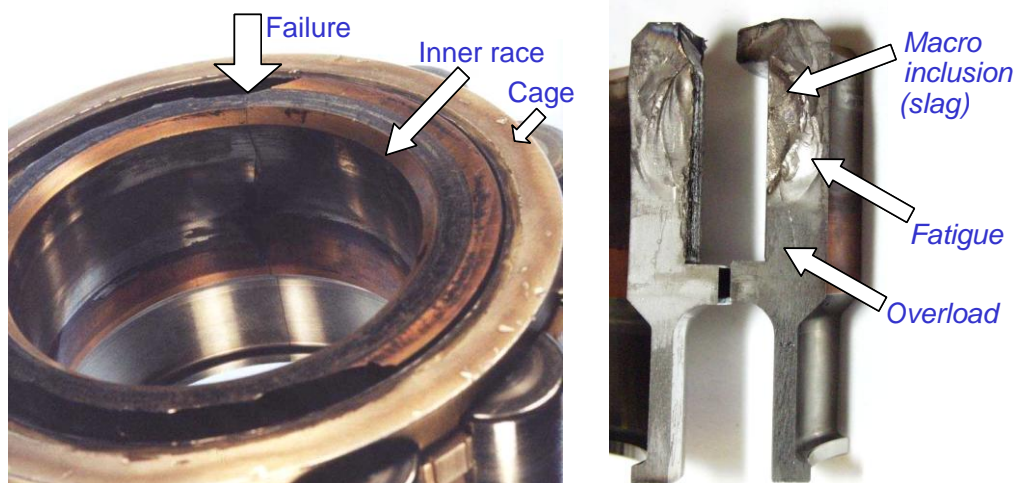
Case 2 - Photos showing failed combiner bearing, [102]
